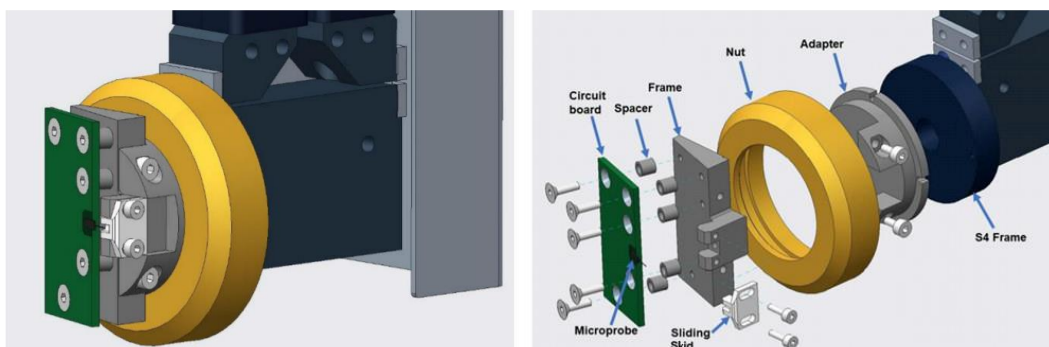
CAD design (left) and exploded view (right) of microprobe integration in a roll measuring instrument.
